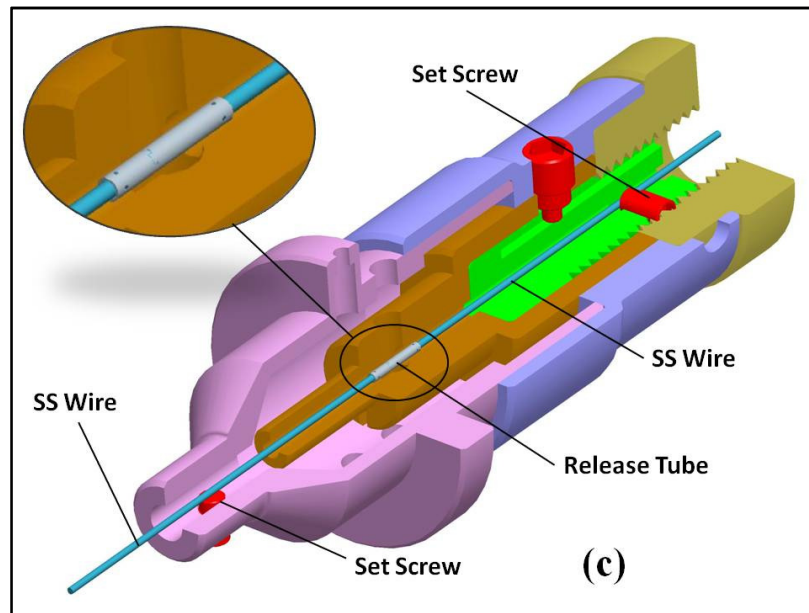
RELEASE TUBE GRIPPED INSIDE ACTUATOR
